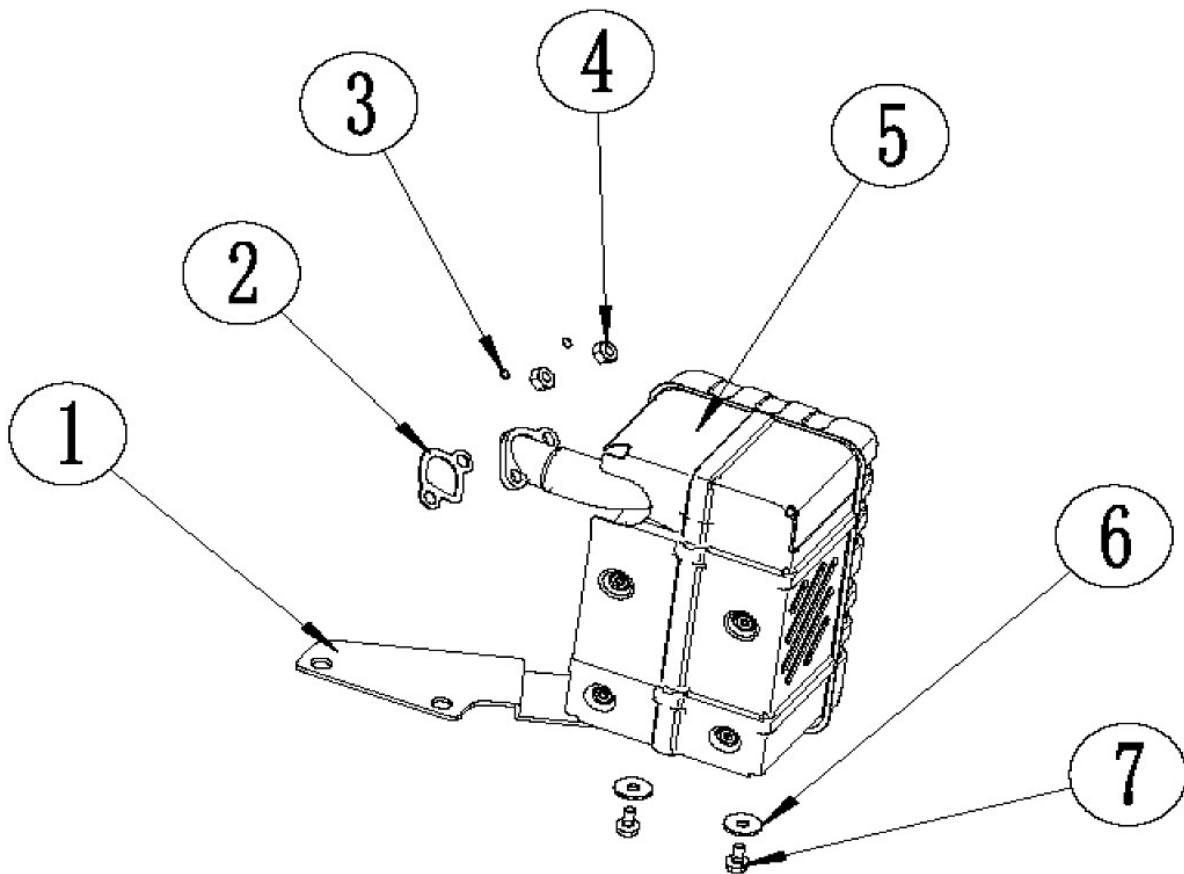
Spare parts drawing 4 PG-I 42 SE
